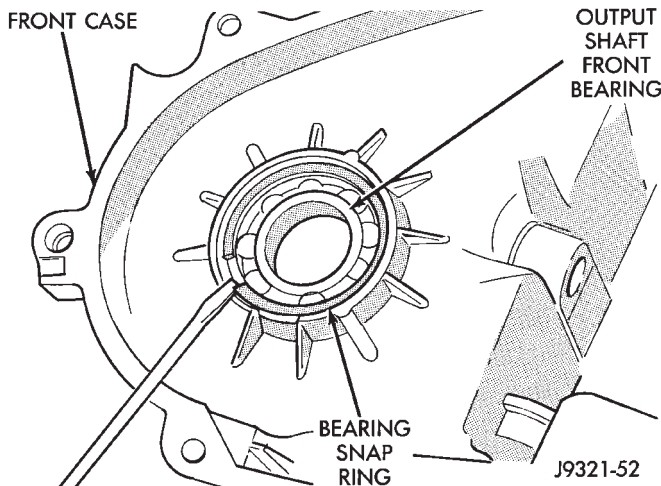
Output Shaft Front Bearing Snap-Ring Removal
